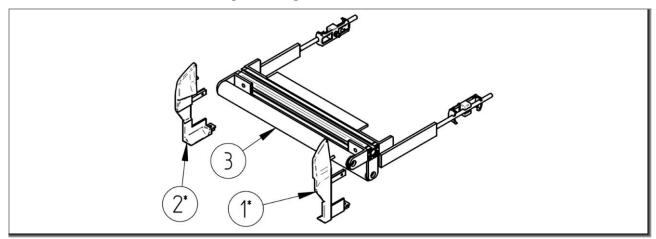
Parts list: Multi-tech rolling knife edges Ø80– ZZ.800.0217.00
